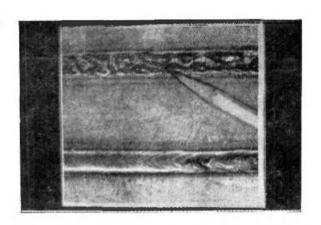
Appearence of bead of welds on stainless steel without and with a triagnetic field.
